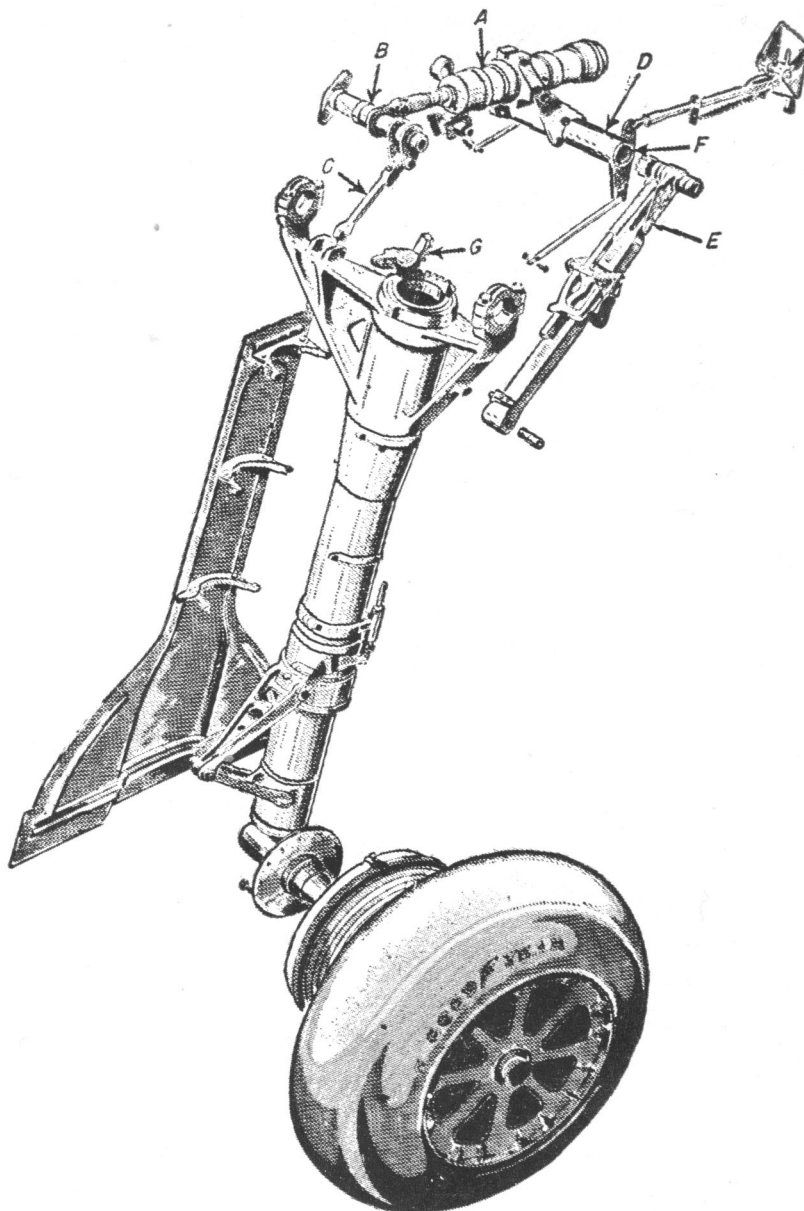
Exploded view of the left main landing wheel of a Grumman F6F Hellcat. The hydraulic cylinder (A) actuates gear through both forward torque shaft (B) and linkage (C); and the aft torque shaft (D) which drives the upper drag strut (E) by means of spline (F). During rearward retraction the wheel rotates 90 deg, the turn being imparted by ratchet (G).
